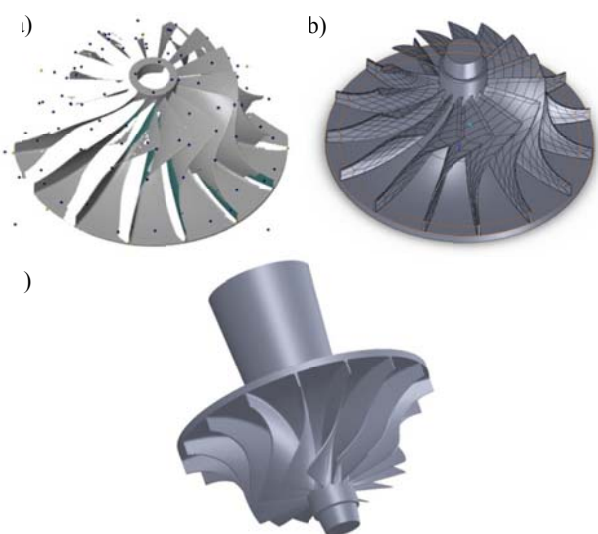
a) Cloud of points of image of the object, b) CAD object of the rotor, c) the concept of casting technology
